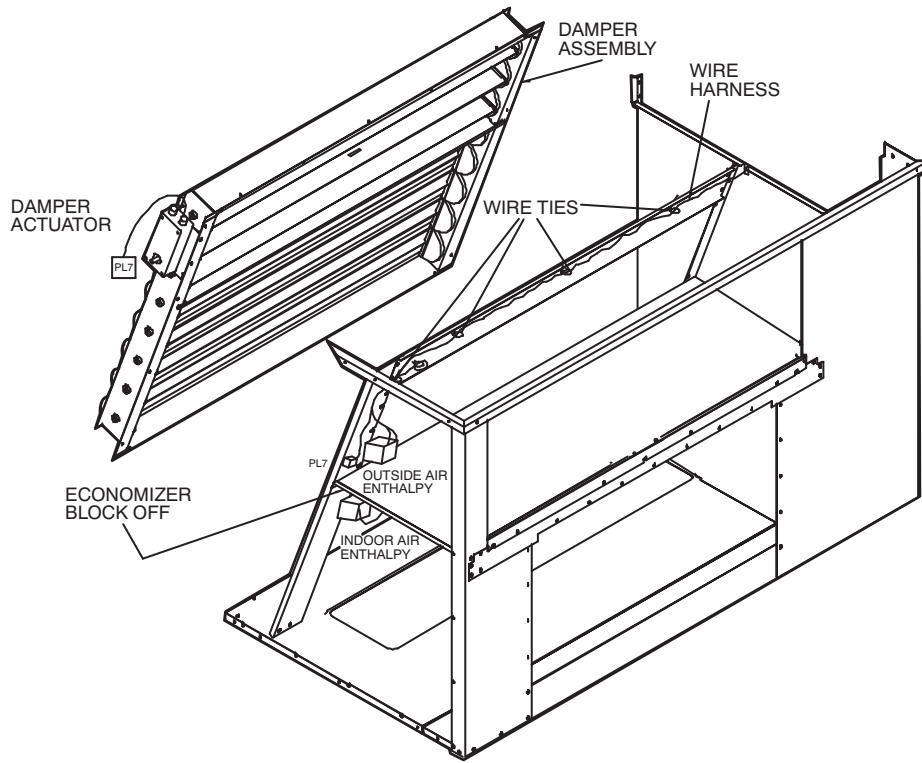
EconoMiSer IV Component Locations (Exploded View)
